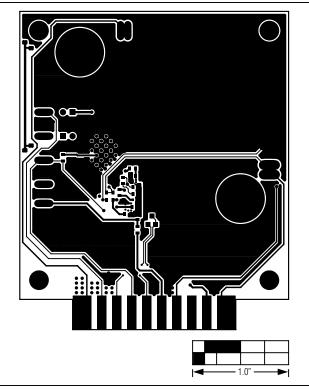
MAX15118 EV Kit PCB Layout—Solder Side
